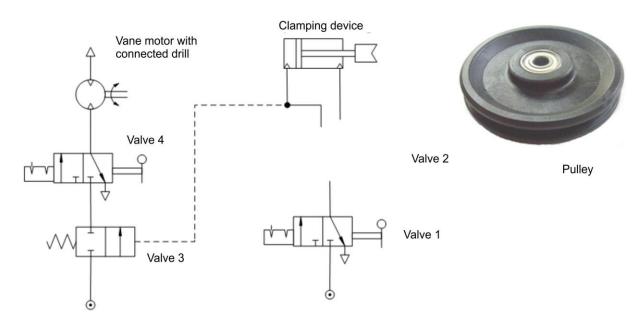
Circuit of the Combined Clamping and Drilling Device
